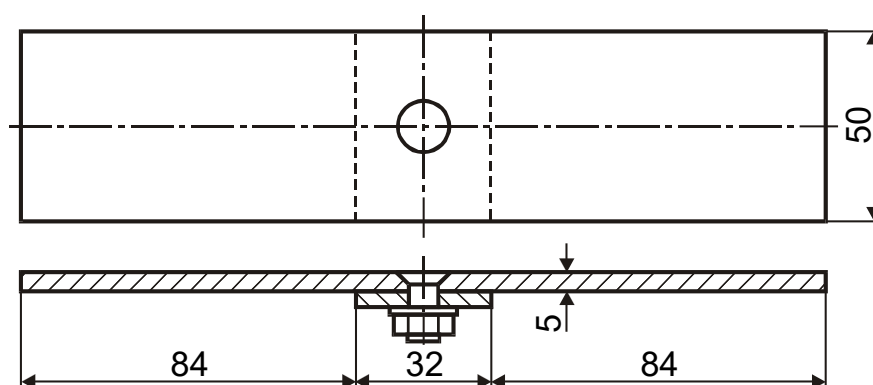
Manufacturing version of plate test-pieces with filled unloaded hole
